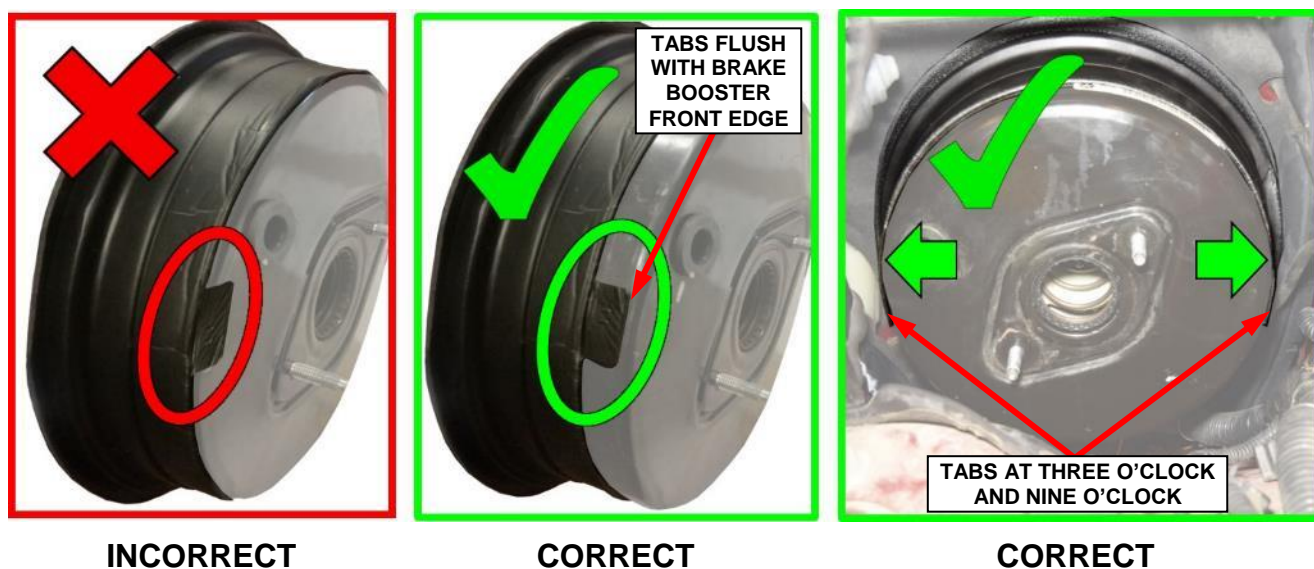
Inspect Brake Booster Water Shield for Proper Installation
